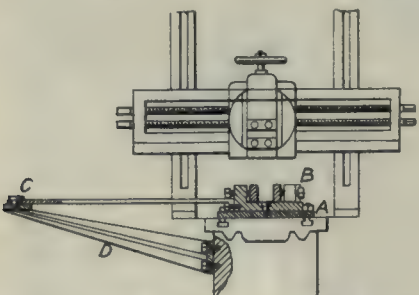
LINK PLANING FIXTURE SHOWING METHOD OF CLAMPING AND ARRANGEMENT OF LEVERS.
